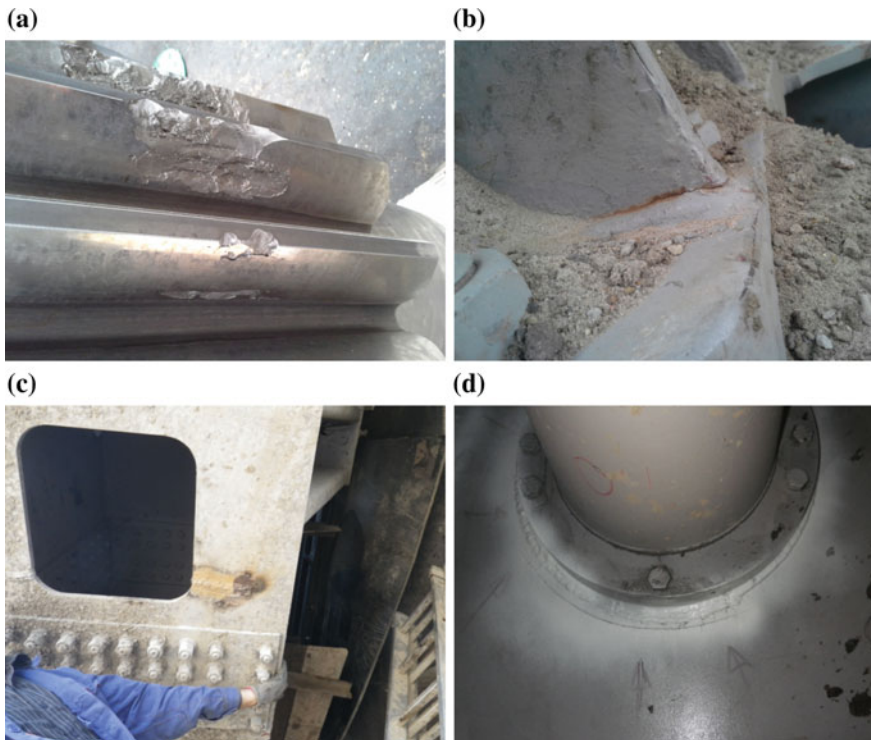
Damaged elements of the bucket wheel drive gear in surface mining machines: a damage to spur gears of the drive gear in SRs 2000 excavators; b fractures on the housing of the gearbox in the SchRs 4000 excavator; c, d damage to the moment beam and its mount in the bucket-wheel drive gear on the SRs 1800 excavator
